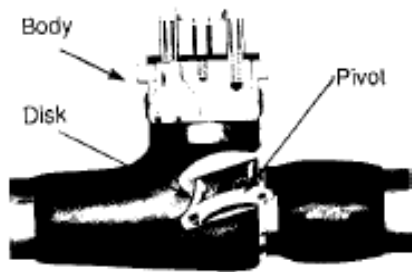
Tilting-disc check valve. (Courtesy BTR Inc./Edward Valve)
